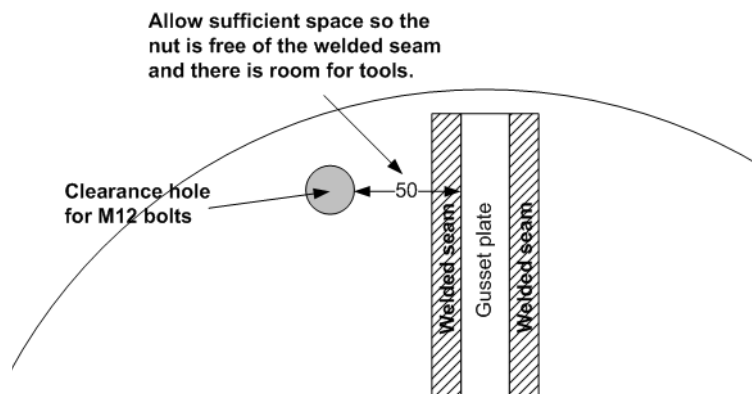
ADU mast flange, distance to the welded seam
